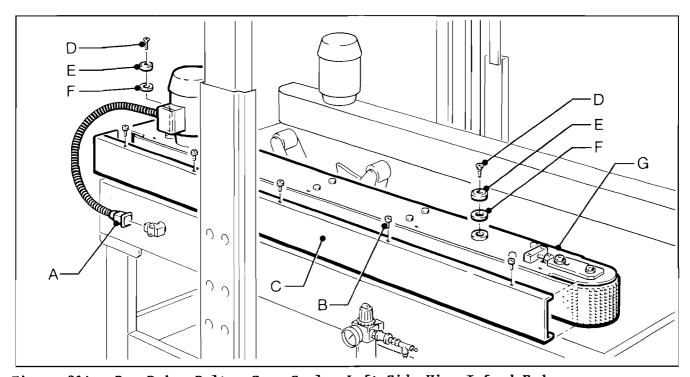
A - Box Drive Belt - Case Sealer Left Side View Infeed End
